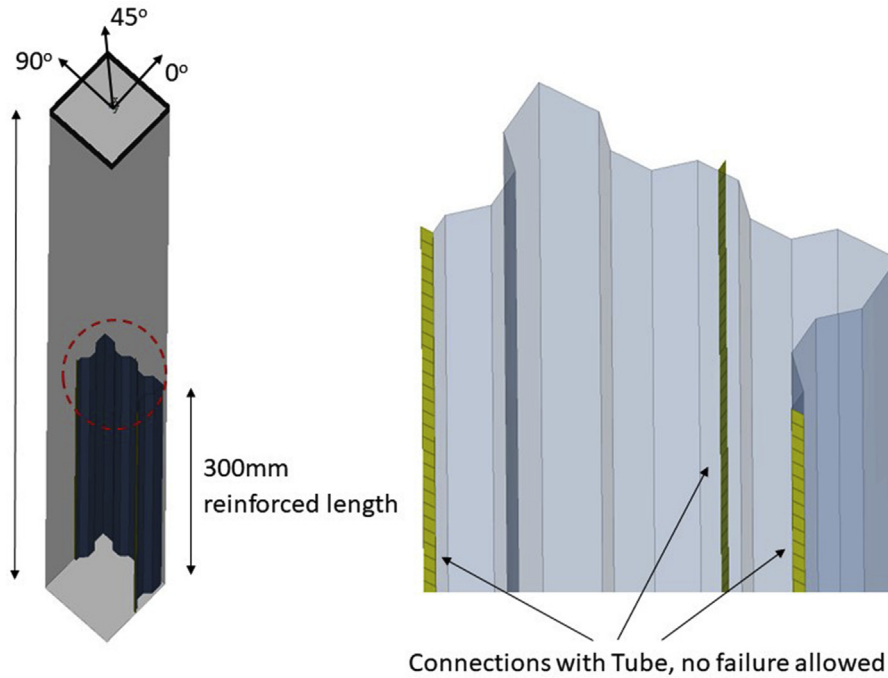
Tube dimensions, detailing the connections between reinforcement insert and outer tube.
